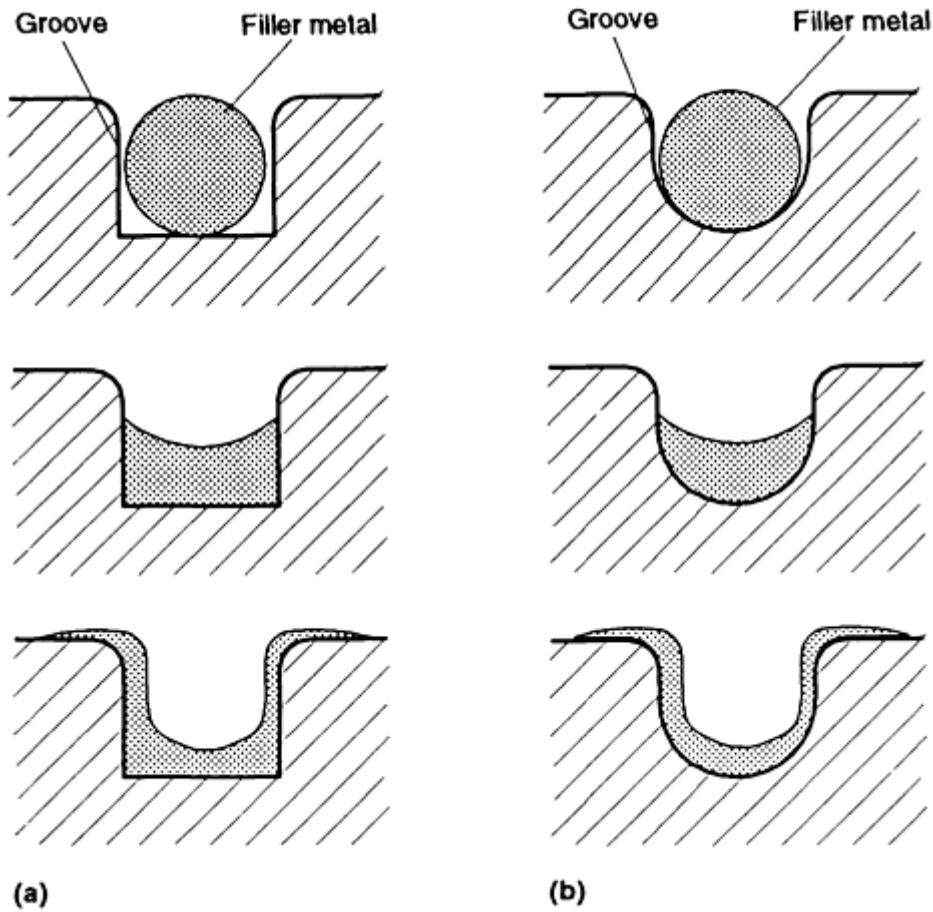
EFFECT OF GROOVE GEOMETRY ON THE SPREADABILITY OF A PREPLACED FILLER METAL. (A) GROOVE WITH SHARP EDGES AND RECTANGULAR BOTTOM. (B) GROOVE WITH RADIUSED CORNERS AND SEMICIRCULAR BOTTOM WALL
